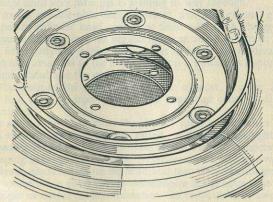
REMOVING OUTER FLANGE, SPLIT-RIM WHEEL: TROJAN, MESSERSCHMITT
